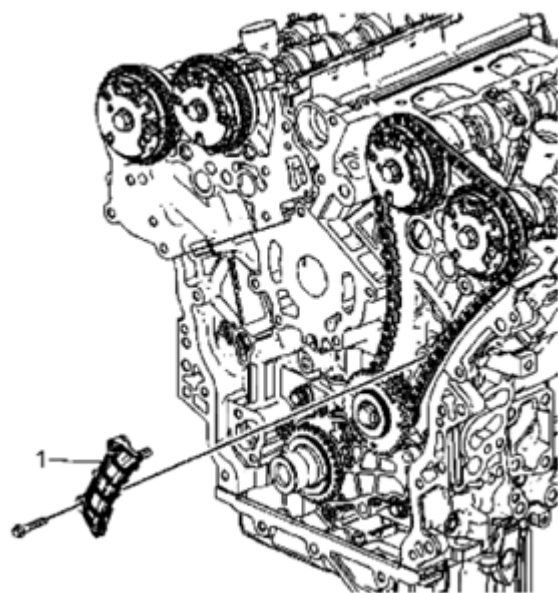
Identifying Timing Chain Tensioner Adjuster No. 3 And Gasket
